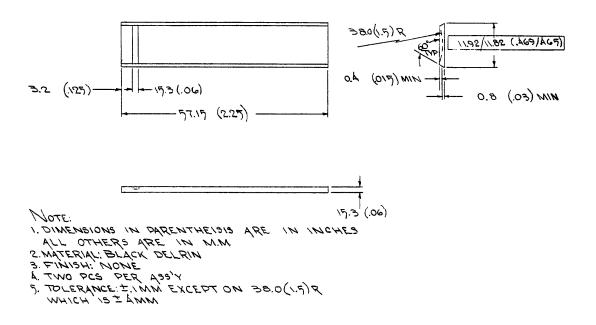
Details of the front and rear shutters used with the filter holder unit from figure 19. Material: black Delrin, two pieces for every filter holder. Dimensions in parentheses are in inches, all others are in mm. Tolerance: ±0.1 mm except on 38.0 (1.5) R.
